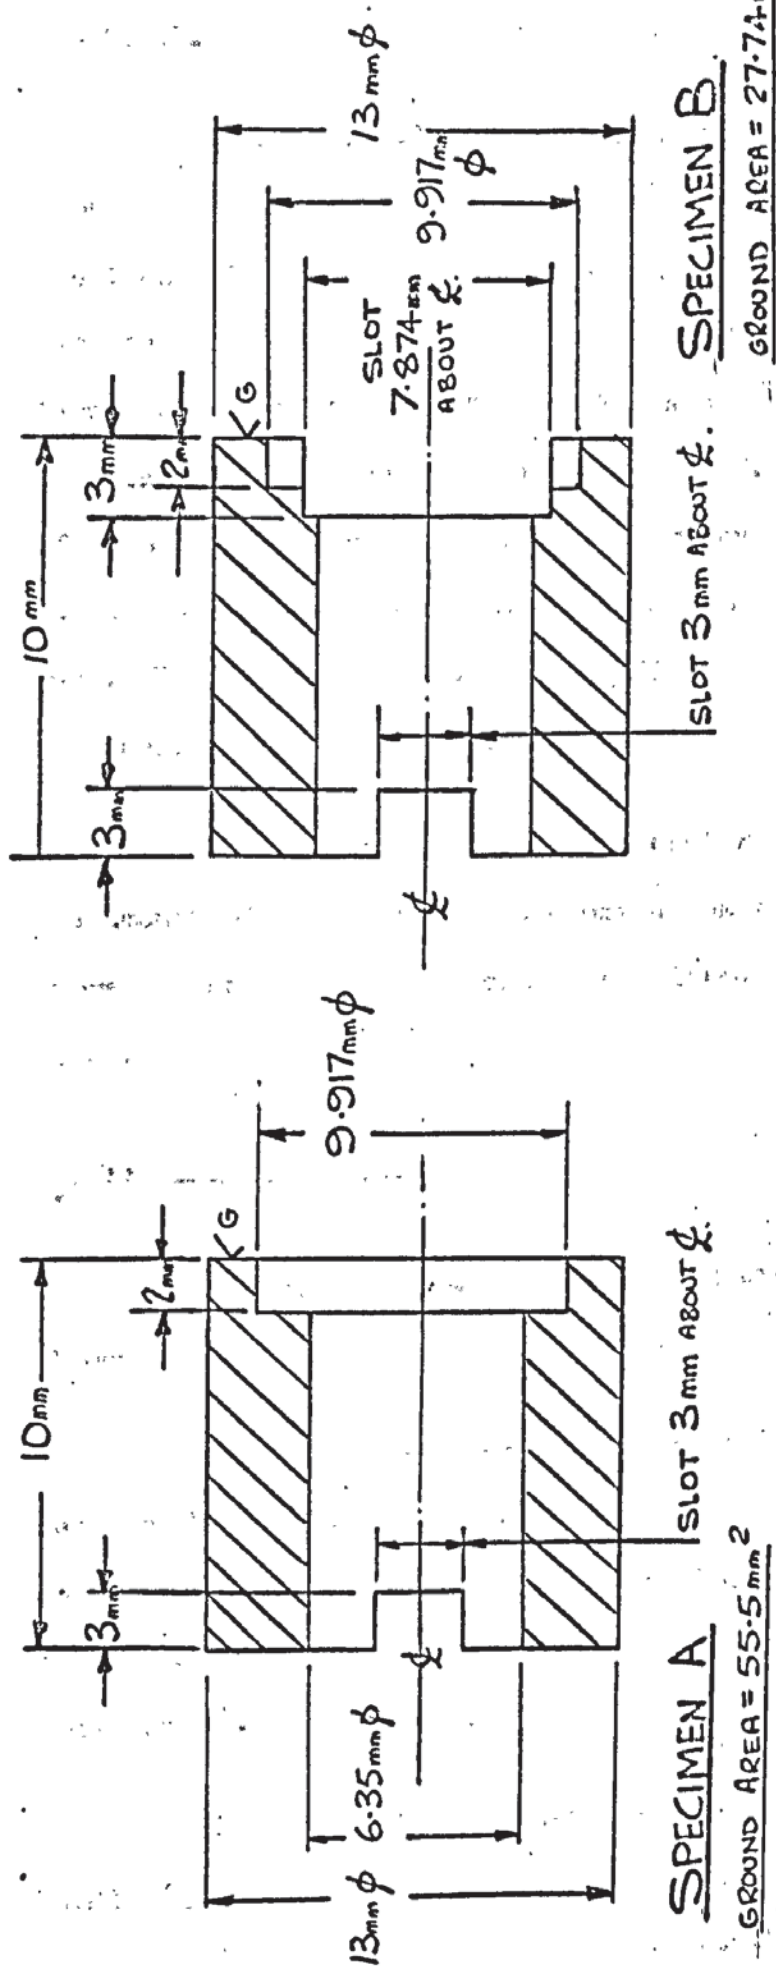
SPECIMEN AND HOLDER DRAWING.
